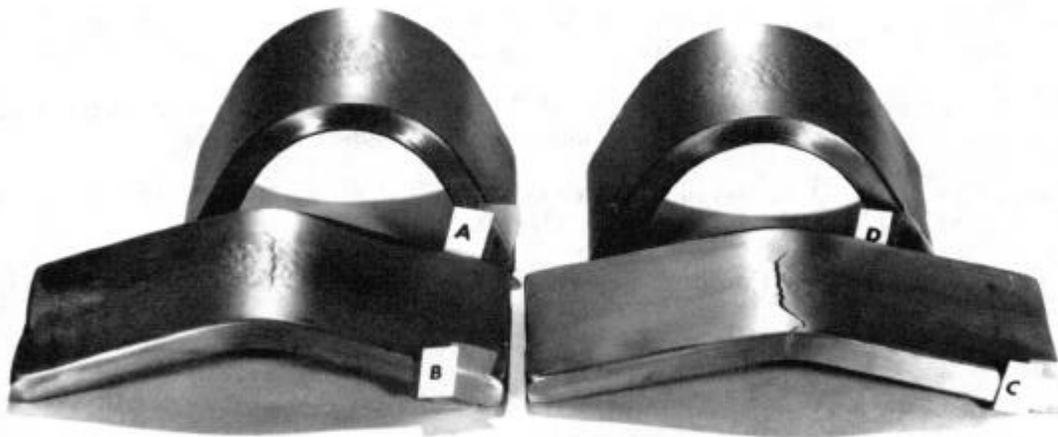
5T longitudinal face bend tests in 1/2-inch-thick alloy 718 base metal, gas-tungsten-arc welded with alloy 718 filler metal. Bend A—as-welded; Bend B—1325 °F (720 °C) aging treatment; Bend C—1750 °F (955 °C) anneal plus aging treatment; Bend D—1950 °F (1065 °C) anneal, furnace cool to 1750 °F (955 °C), plus aging treatment.
